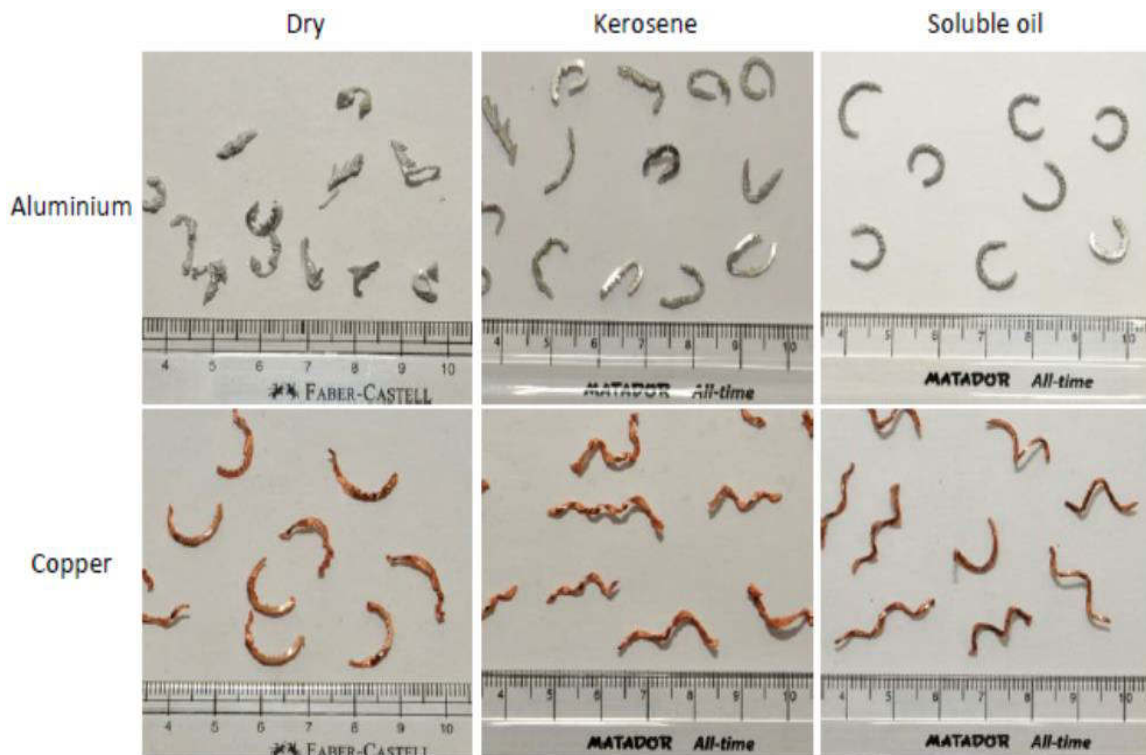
Optical images of the machined chips generated under various machining conditions: 19.4 m/min speed, 0.5 mm depth of cut
